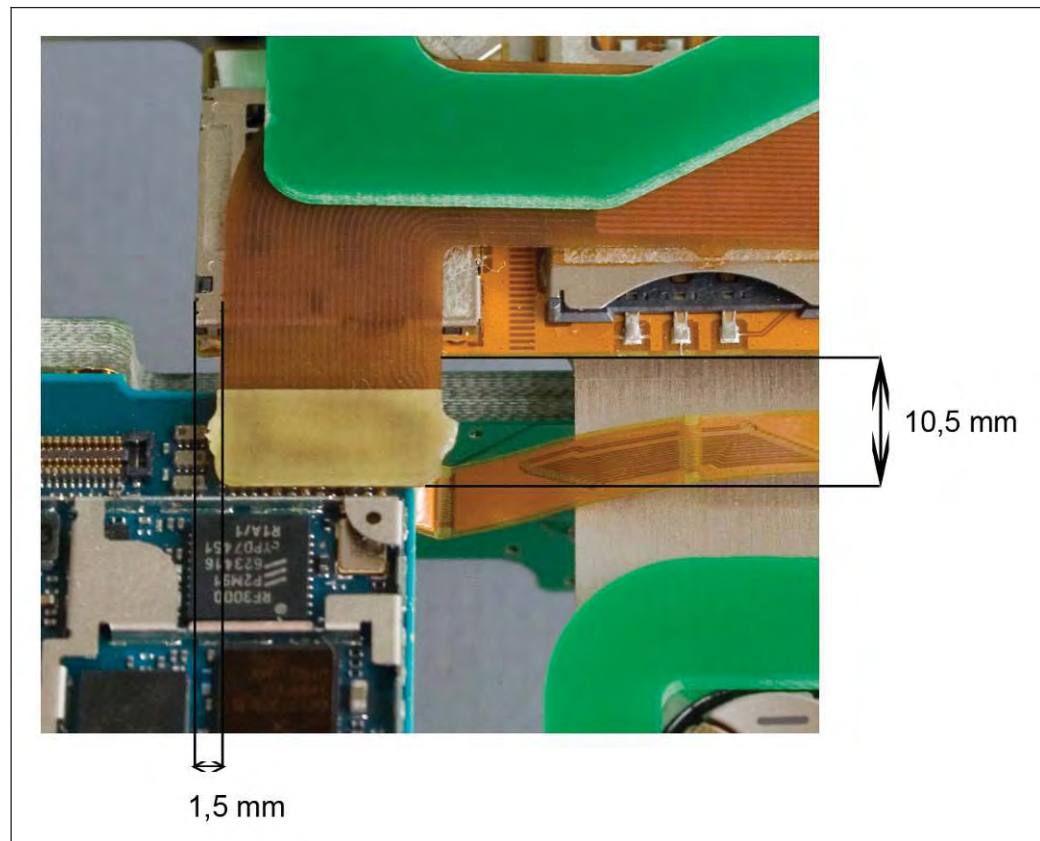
The distances from the edge of the key flex cable to the edge of the SIM/M2 flex module shall be horizontally 1,5 mm respectively vertically 10,5 mm.
